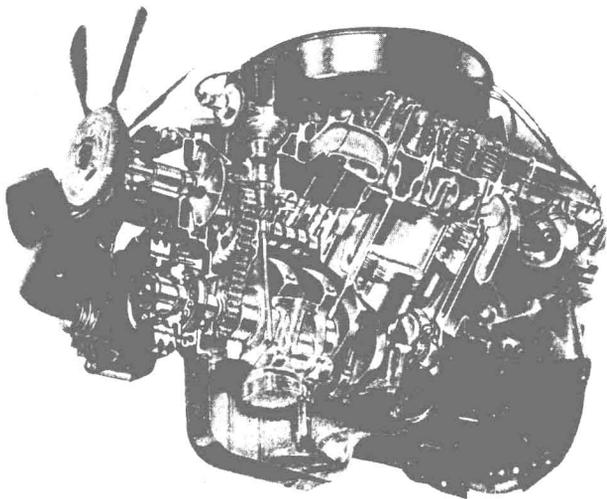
Cutaway view of an eight-cylinder, V-type engine. (Ford Motor Company)
